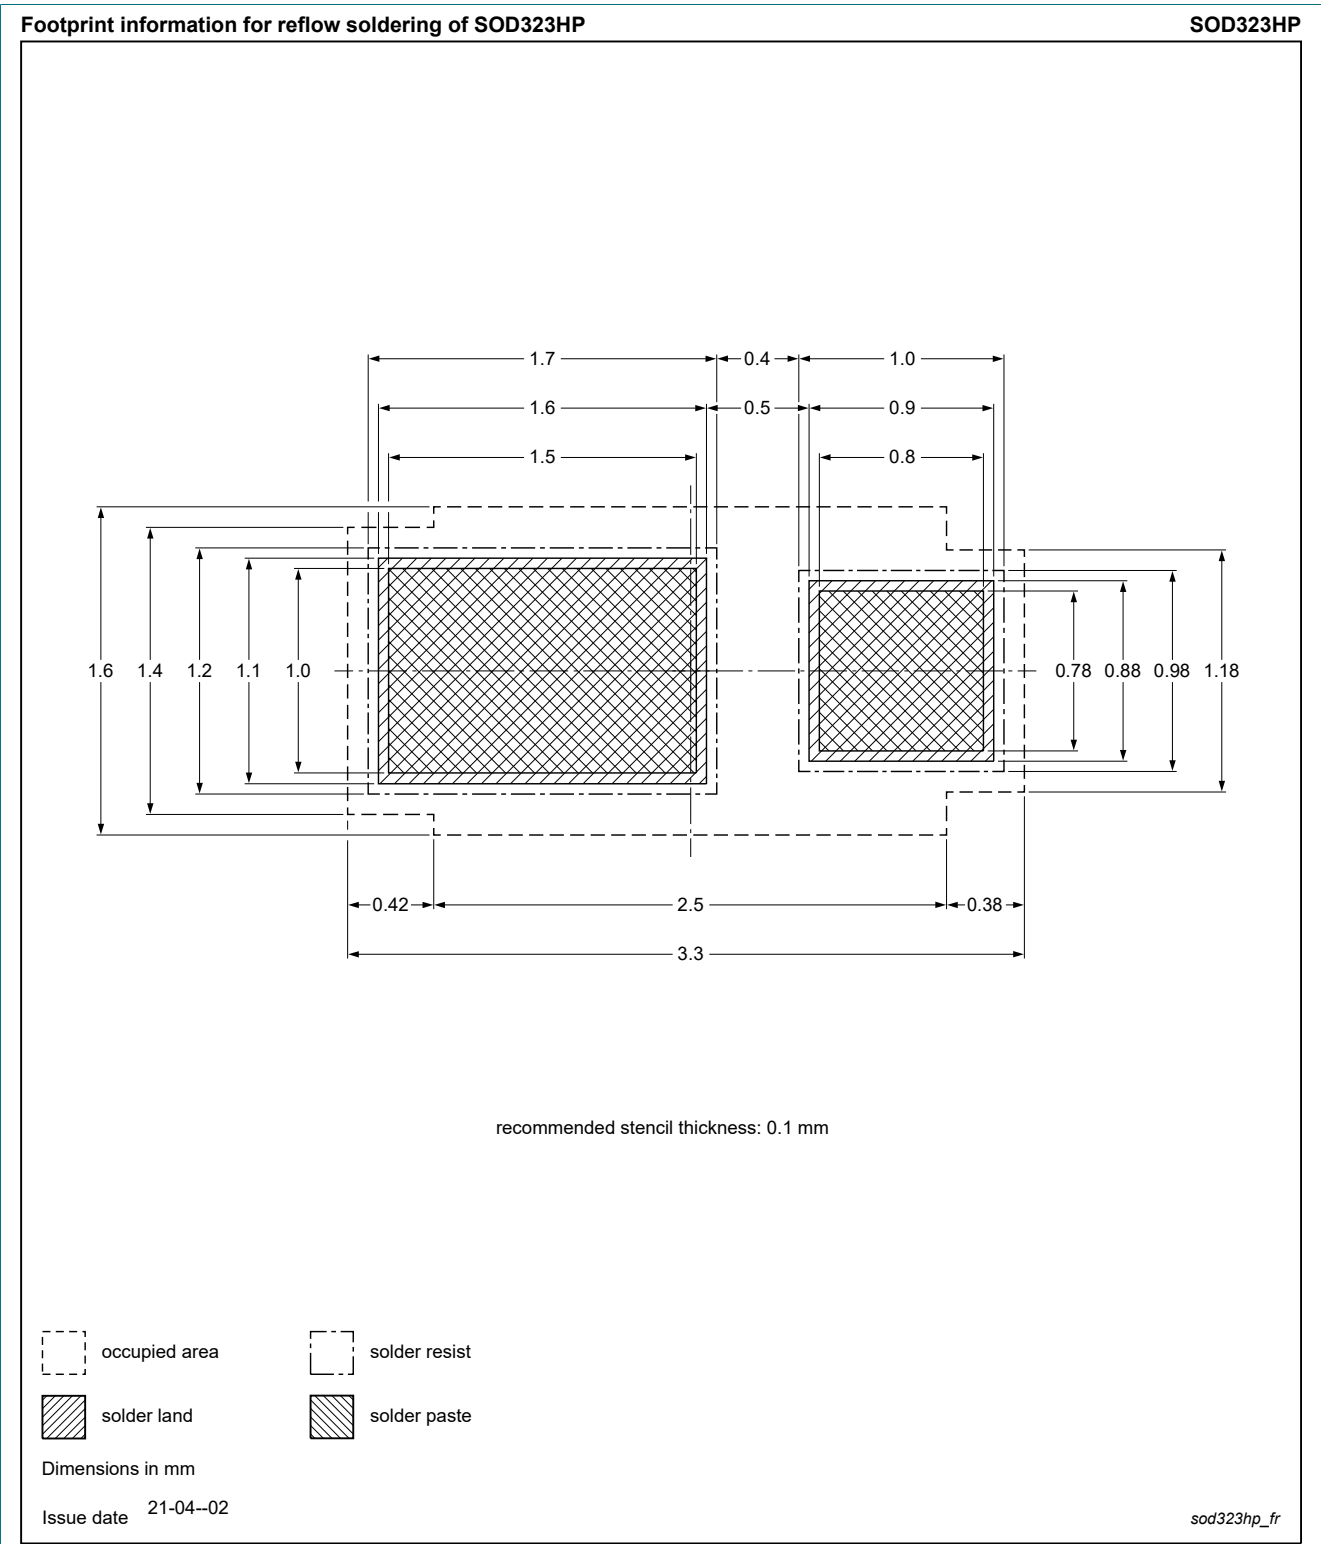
Reflow soldering footprint for CFP2-HP (SOD323HP)
